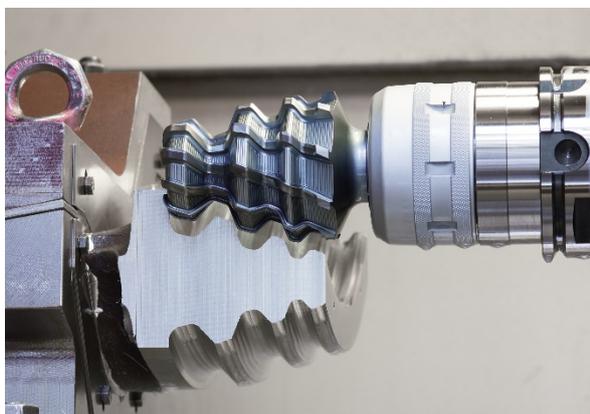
Machining a blade root with the FRANKEN Pagode form end mill
